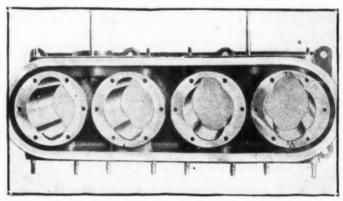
Showing the top of the casting of the Swiss slide-valve motor with the recesses in which the valves operate
